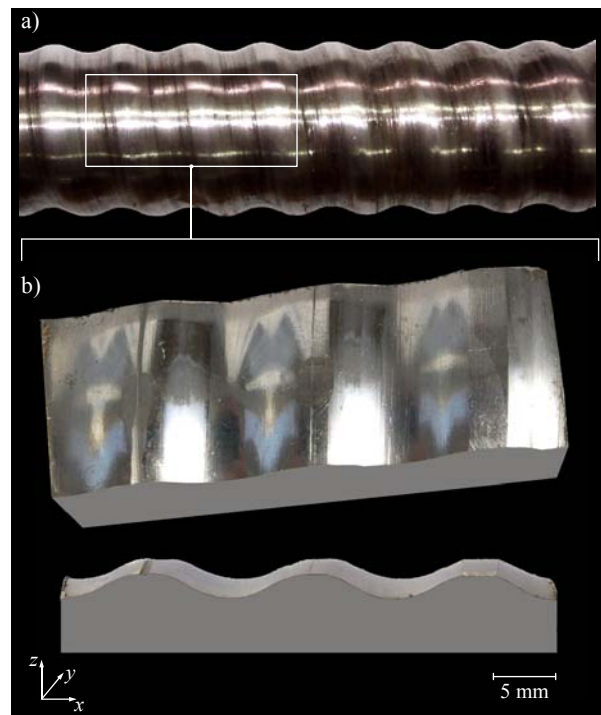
Sample used in the experimental tests: a) a fragment of the pipe $\square 31 \times 12.56$ mm with external round threads after the cold rolling process, b) general and side view of a sample (rectangular plate $40 \times 20 \times 8$ mm cut out from the pipe)
